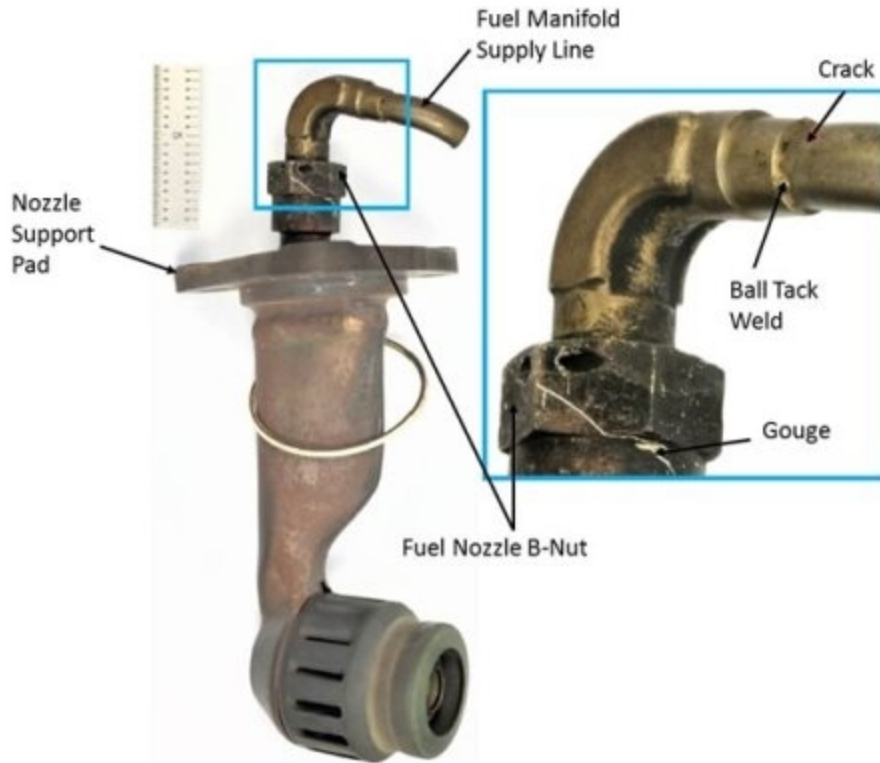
Fuel Nozzle No. 1 and Fuel Manifold Supply Line Section
